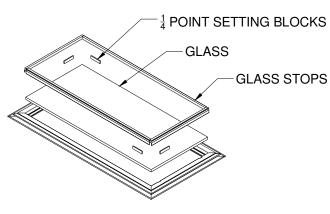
Glass Installation (Left Hinge-Casement Shown)
